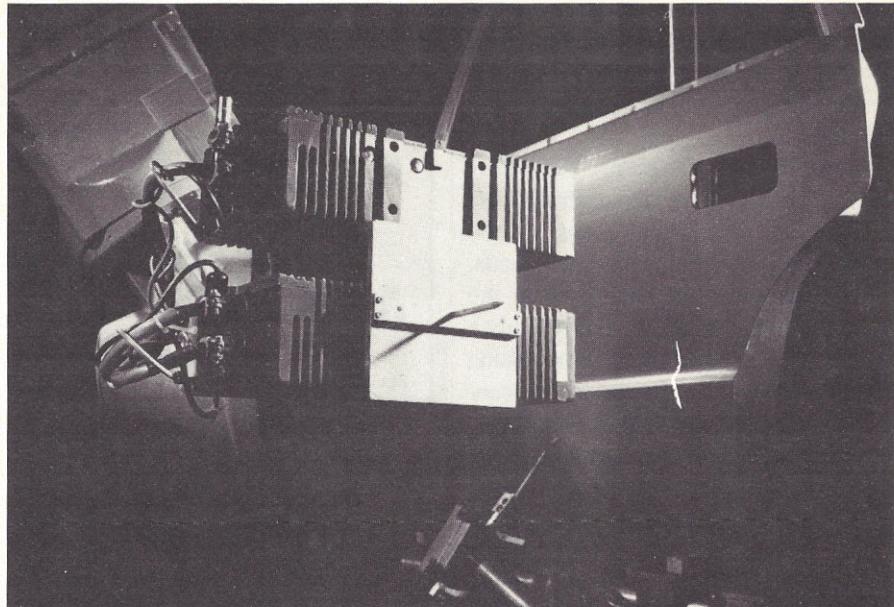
A beam of laser light is projected onto an automobile door subassembly by the laser within each sensor mounted on the robot's tooling plate.
